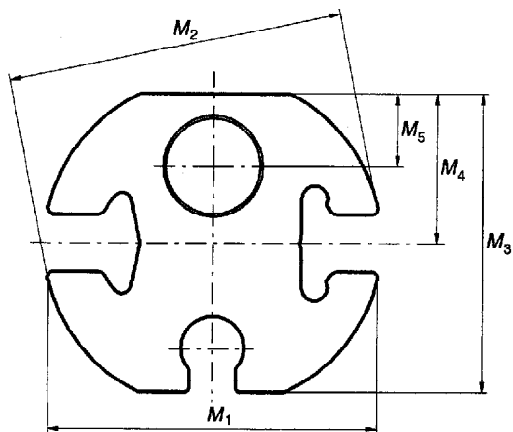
Dimensions of gauges for ball coupling size 16N and 18N
